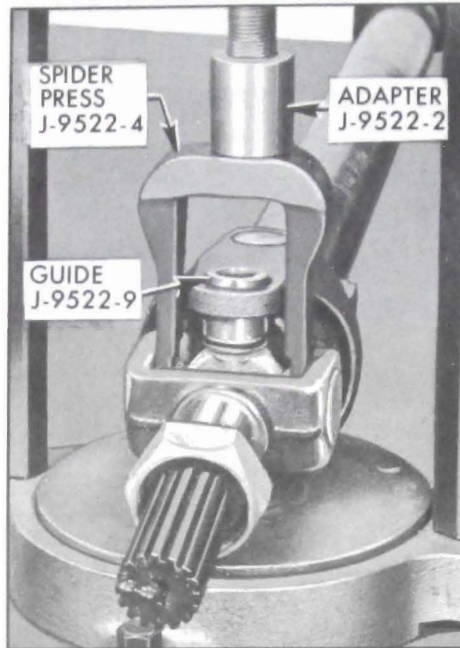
Removing Bearing With Guide and Spacer in Place
